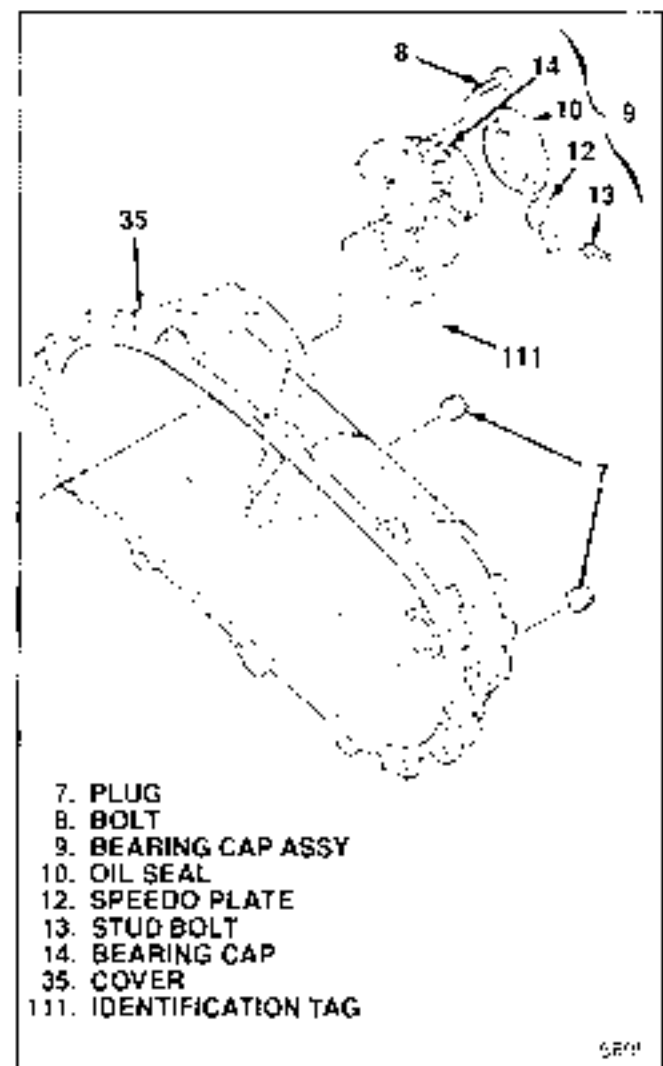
Bearing Cap Group (Rear Yoke or Flange)
